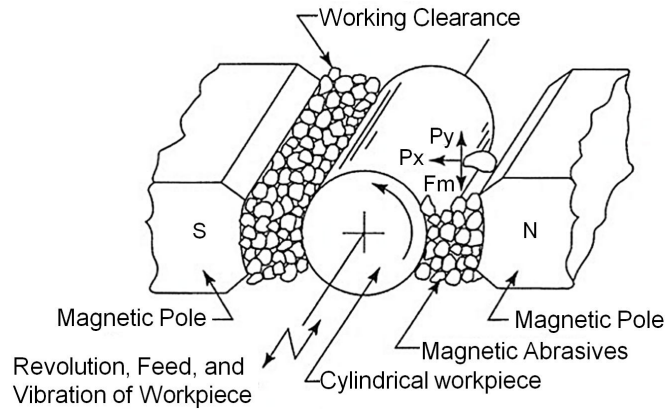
Cylindrical magnetic abrasive finishing process [8]
